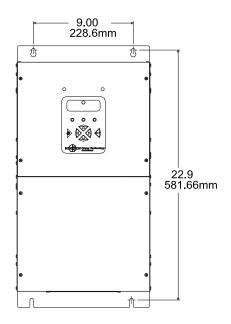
M3645 M12 Chassis Dimensional Outline
